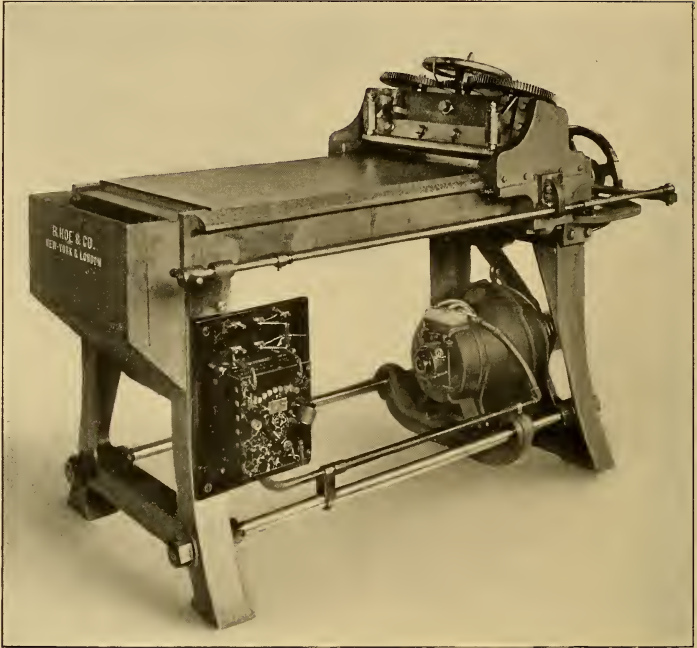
A STEREO TYPE PLANING AND SHAVING MACHINE, DRIVEN BY A MOTOR MADE BY THE SPRAGUE ELECTRIC CO., NEW YORK
